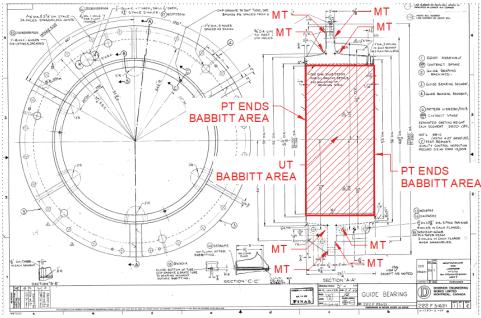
Turbine Guide Bearing Inspection Diagram
